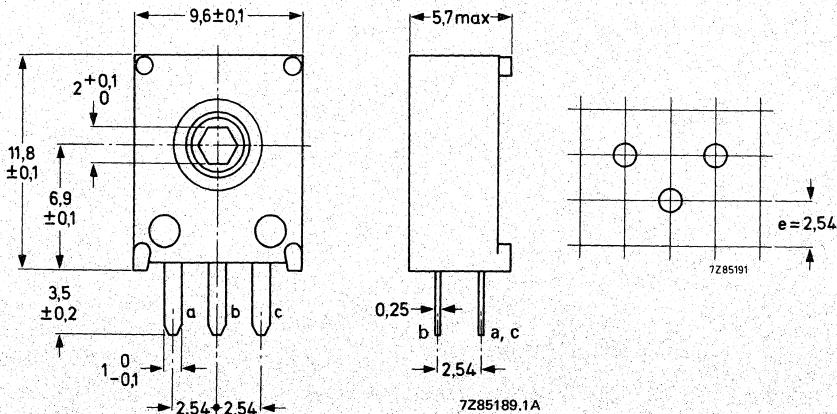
Vertical mounting, version with hexagonal recess (insulated cold wiper, b).
